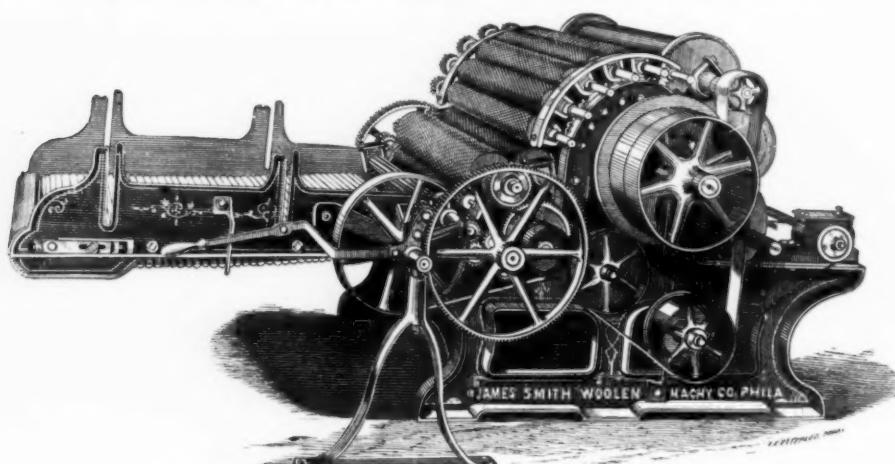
RIGHT HAND SIDE VIEW OF LOW DOWN GARNETT MACHINE.
